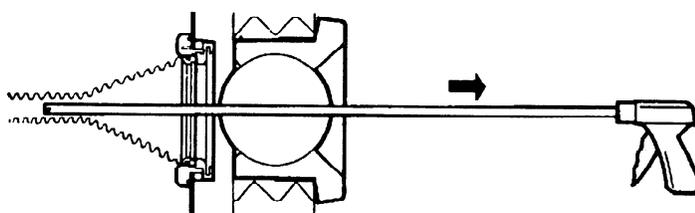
Mounting of remote-handling tongs on containment enclosure walls behind shielding
